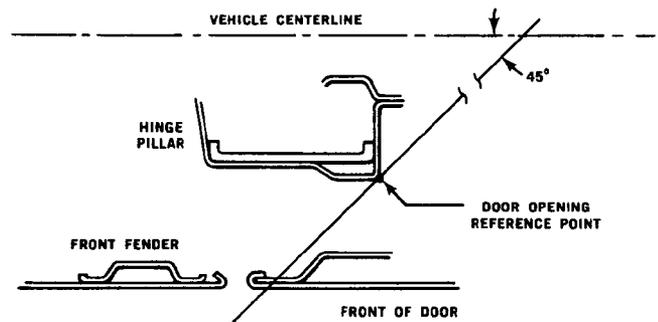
TYPICAL SECTION A-A SHOWING DOR POINT WITH HINGE PILLAR TANGENT TO 45 DEG LINE
